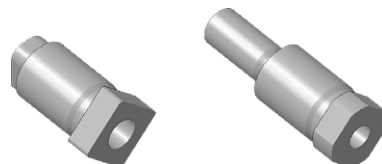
PLUGGED POSITIONING AID (LEFT) AND SCREWED POSITIONING AID
